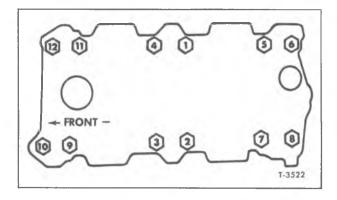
Intake Manifold Bolt Tightening Sequence on 350 V8 Engine
